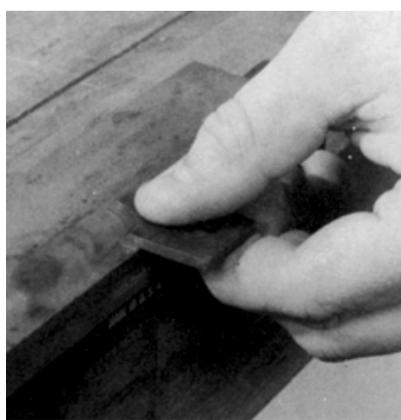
Lay the flat face of the molder knife on the surface of the hone and rub the knife back and forth.
